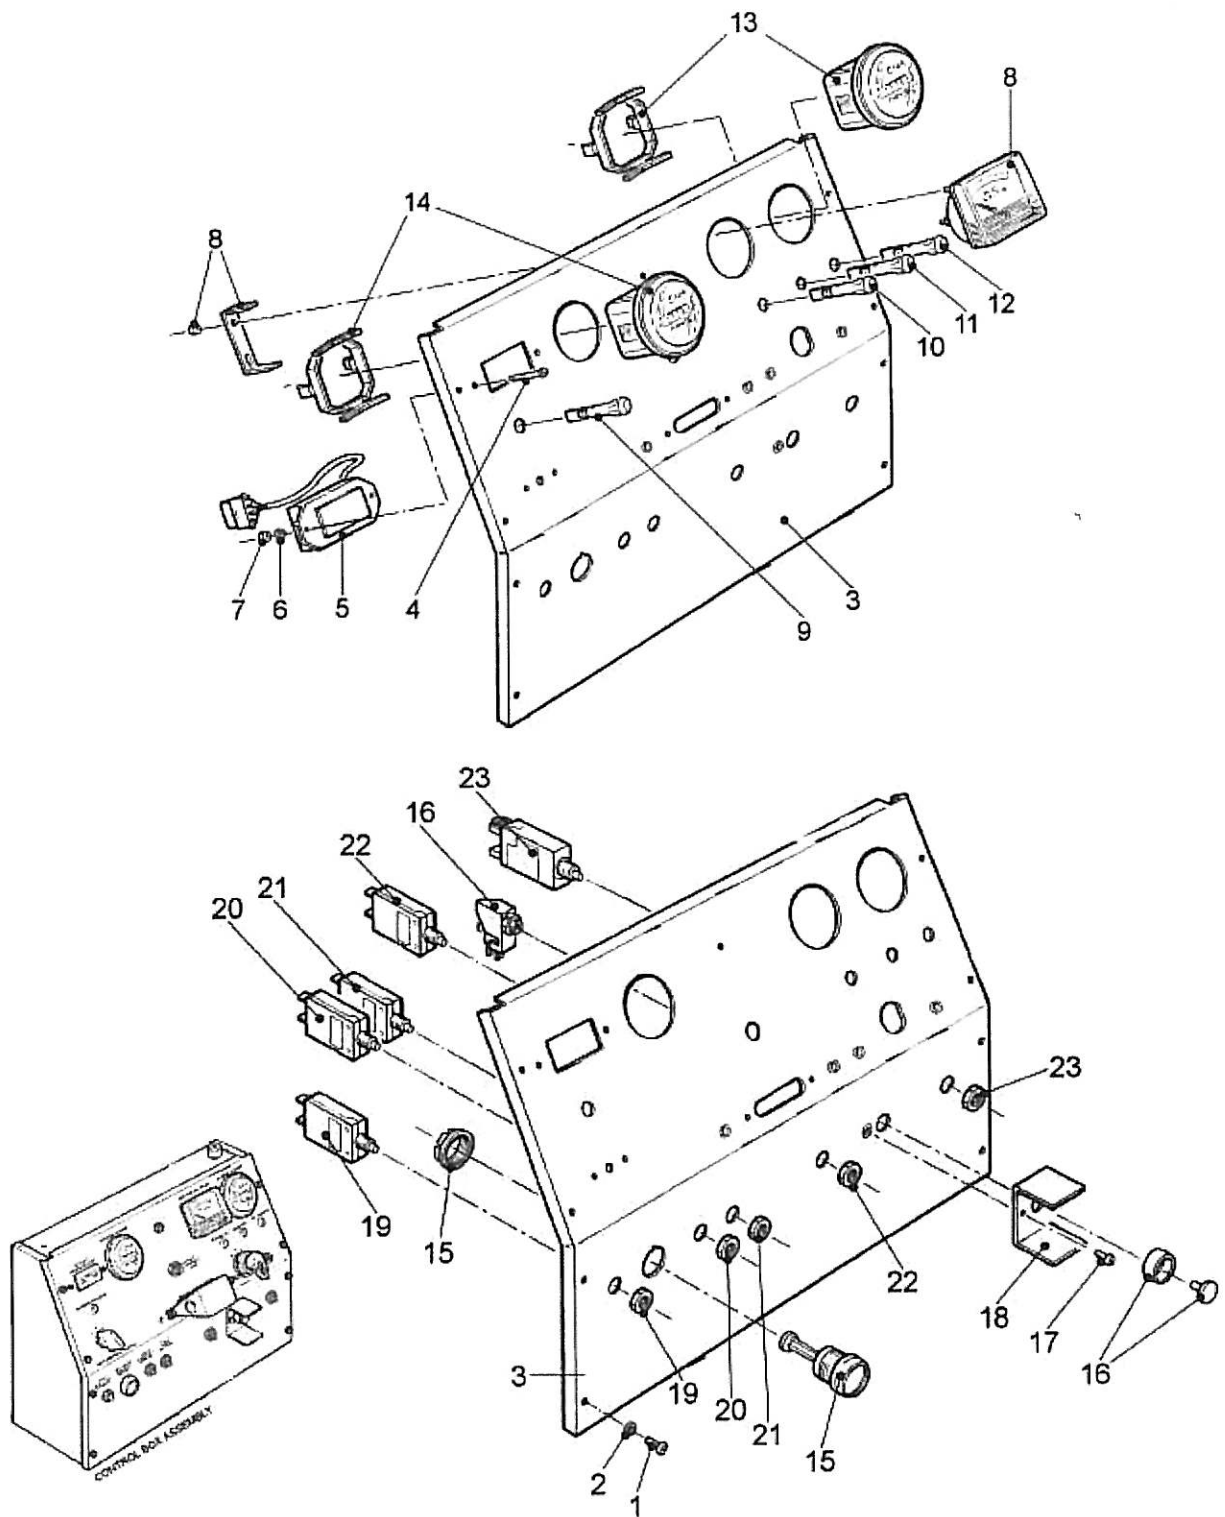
CONTROL BOX ASSEMBLY (SHEET 1 OF 2)
